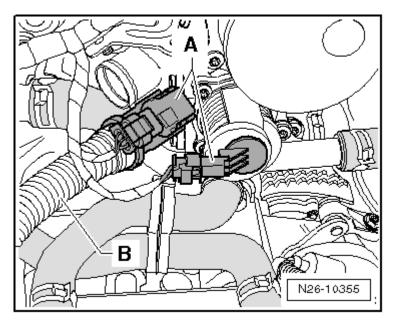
Identifying Secondary Air Injection (Air) Solenoid Valve N112 Connector And Hose
